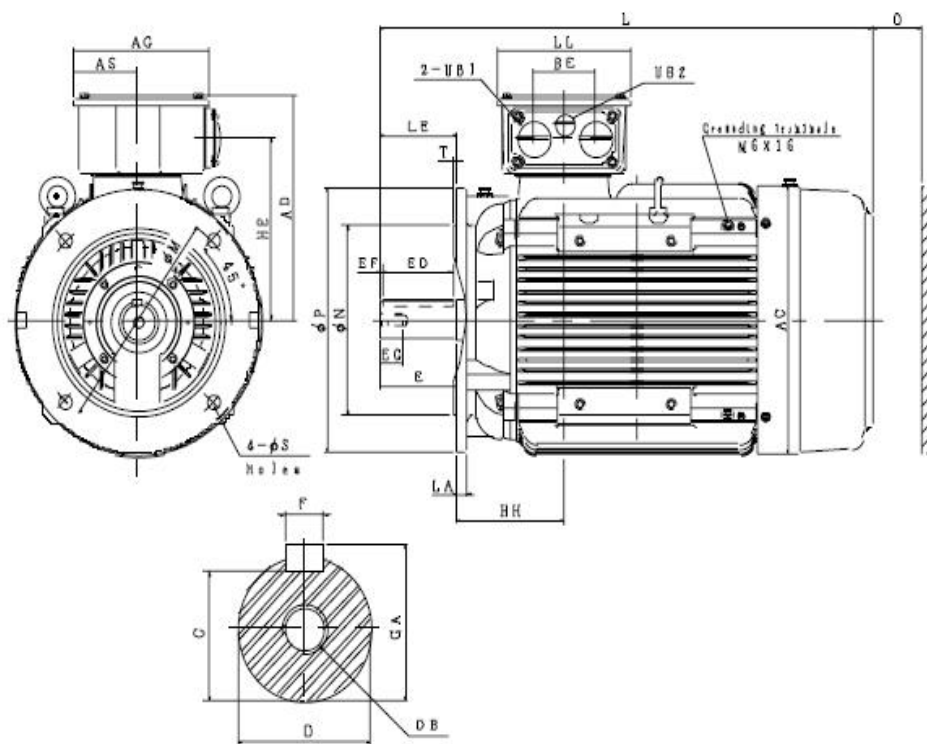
Outline drawing of cast iron design, flange version, mounting B5, frame size 180
